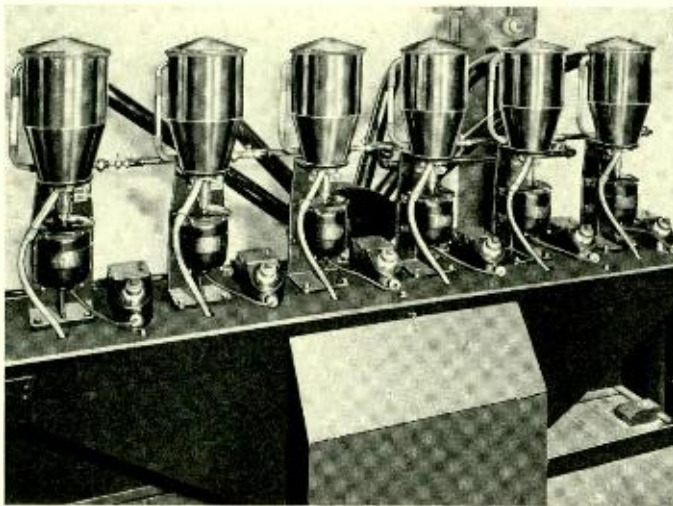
In the arrangement adopted, six finish-testing machines are mounted as a unit. The large pipes connecting to the upper part of the sand chambers are the suction connections, and the smaller horizontal pipe at the rear carries the compressed air for sand circulation
